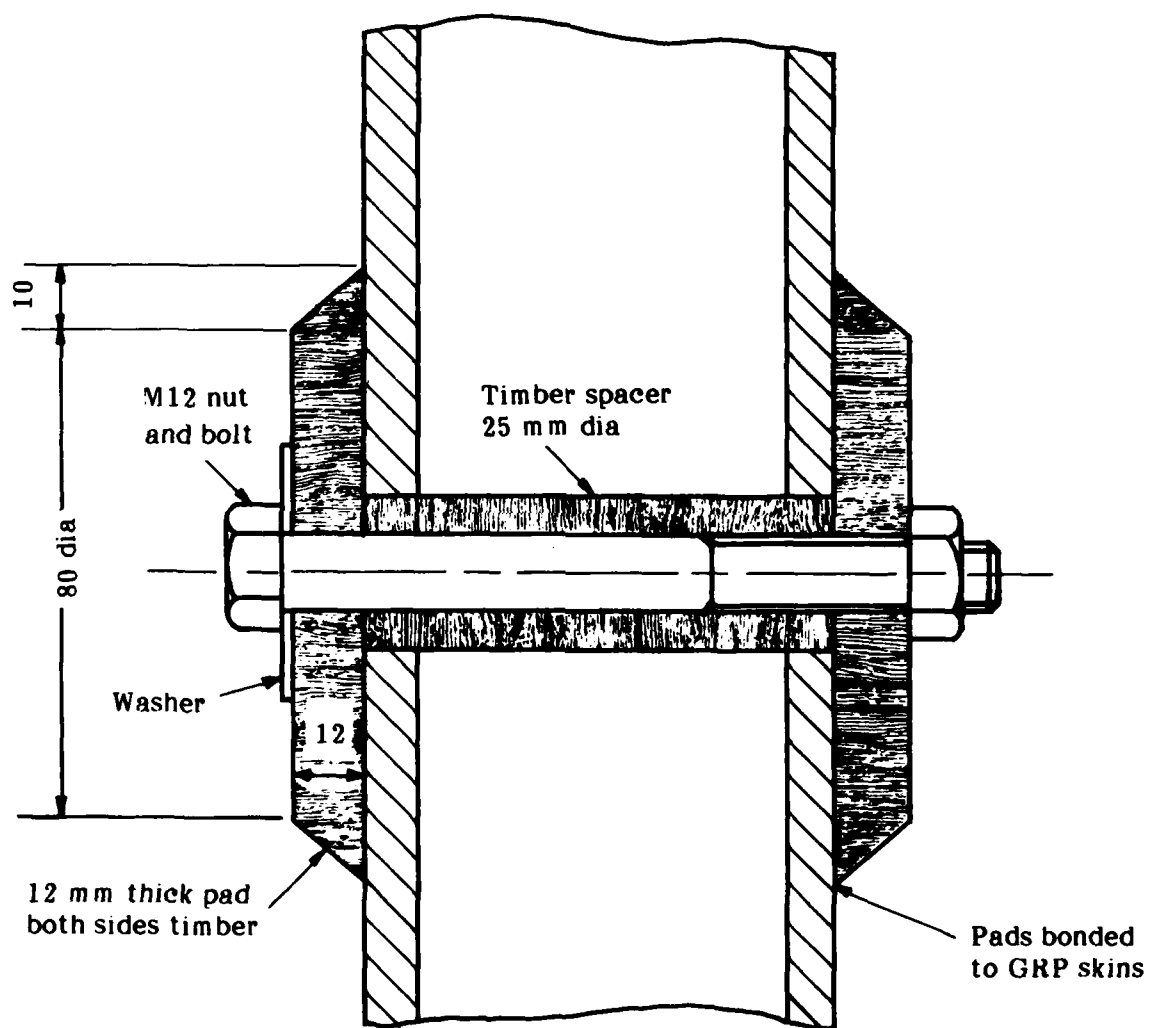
CONSTRUCTION OF SHEAR TEST SPECIMENS WITH WOODEN SPACER THROUGH THE SPECIMEN AND WOODEN PADS BONDED TO GRP SKIN
